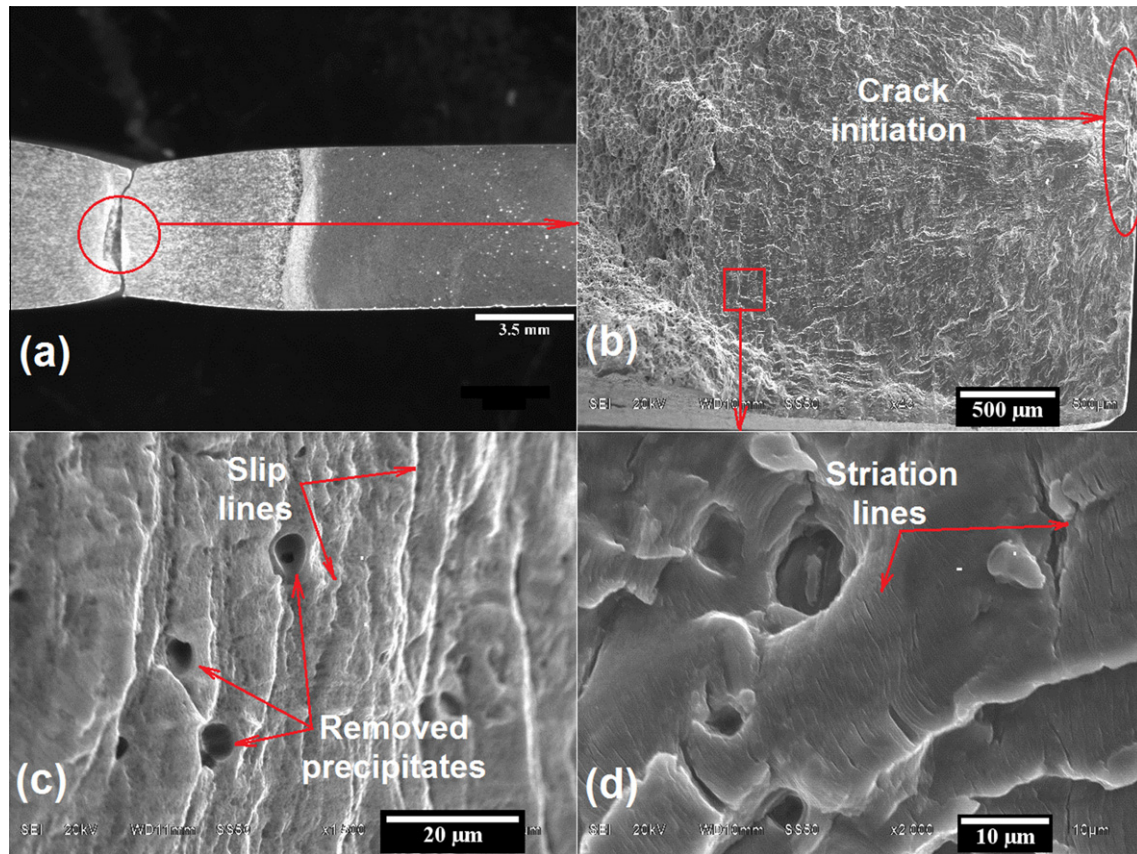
Fatigue failure of aluminium 6061-T651 welded with ER5183 filler wire tested in ambient air: (a) crack location in the heat-affected zone; (b) fatigue crack initiation site; (c) the fracture surface with removed precipitates; and (d) removed precipitates on the fracture surface.
